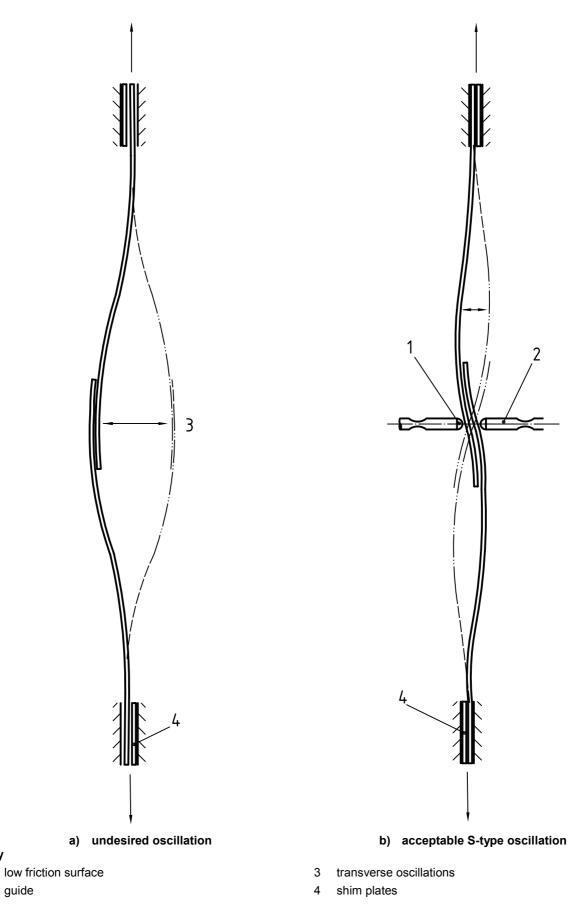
Unacceptable and acceptable types of transverse oscillations arising during fatigue testing of spot welds in thin sheet
